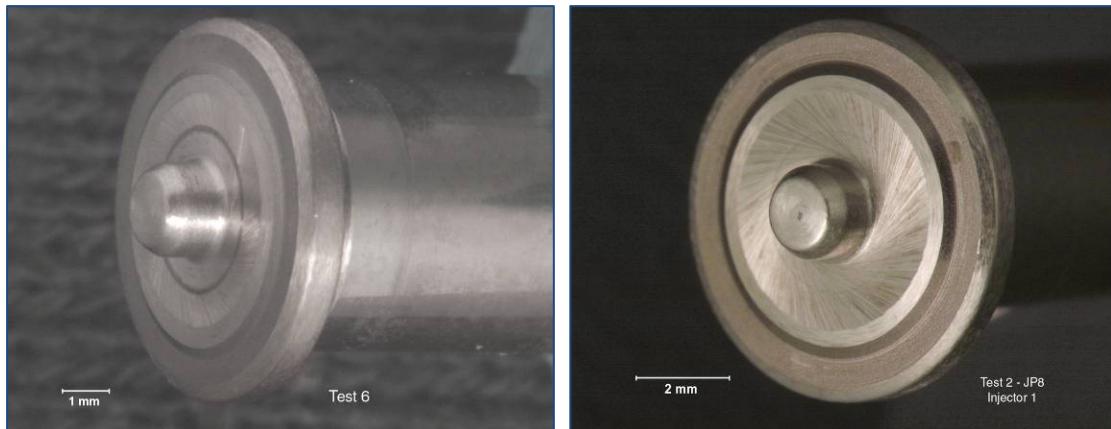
AF-8029 JP-8 (HT Left), Upper Hydraulic Coupler Piston, JP-8 (Base Right)
